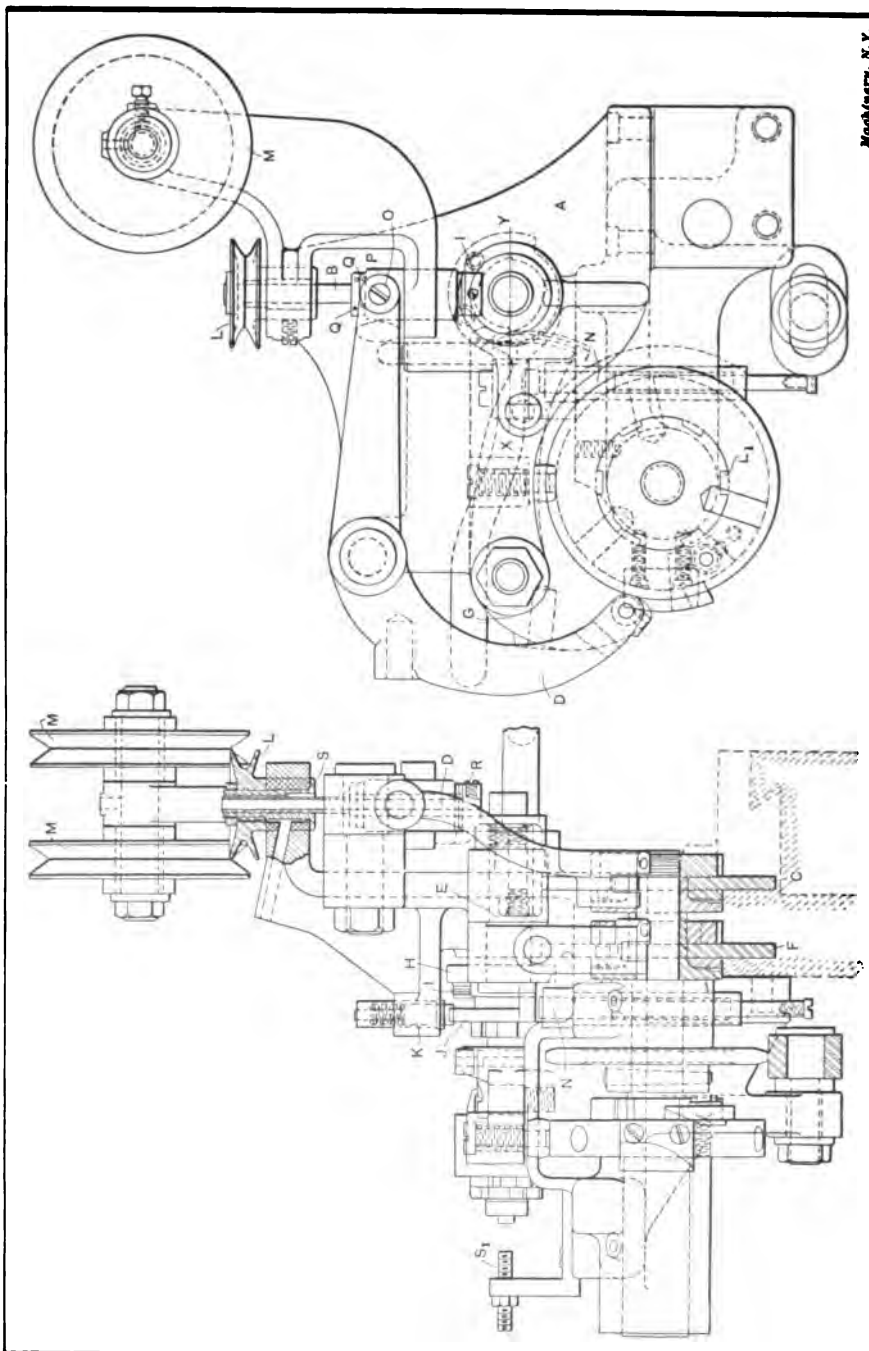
Assembly View of the Index Drilling Attachment for the No. 00 Brown & Sharpe Automatic Screw Machine
